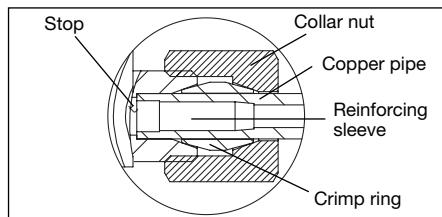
Installation – Part 1 1341271 / 1341274
